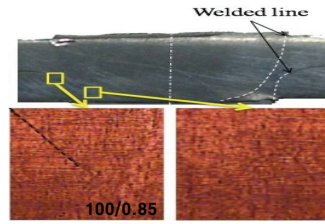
Sectional shape of extru-riveting welded aluminum plate
